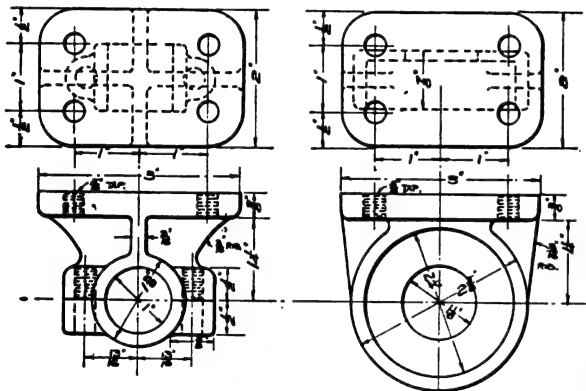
DETAILS OF FRONT AND REAR AXLE FITTINGS.
